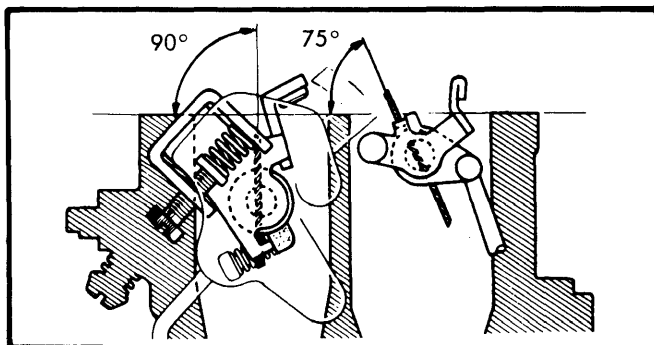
Adjusting Primary and Secondary Throttle Valves
